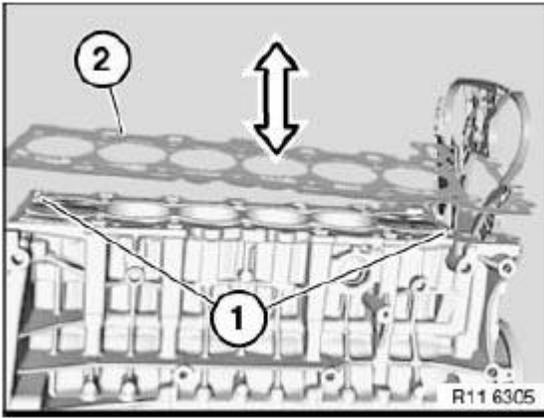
Mounting Cylinder Head Gasket On Engine Block
